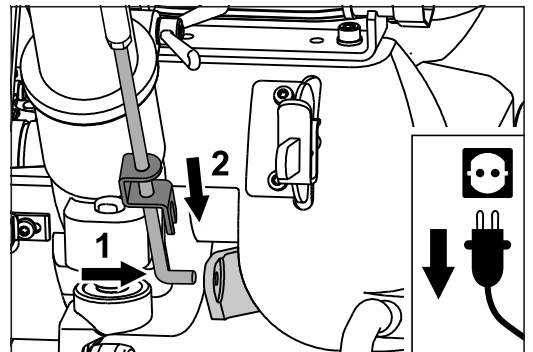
Put the lower rod in the hole of the lifting fixture (1) and fix them with the closure (2).
